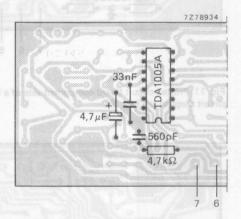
Printed-circuit board component side, showing component layout of Fig. 15.
